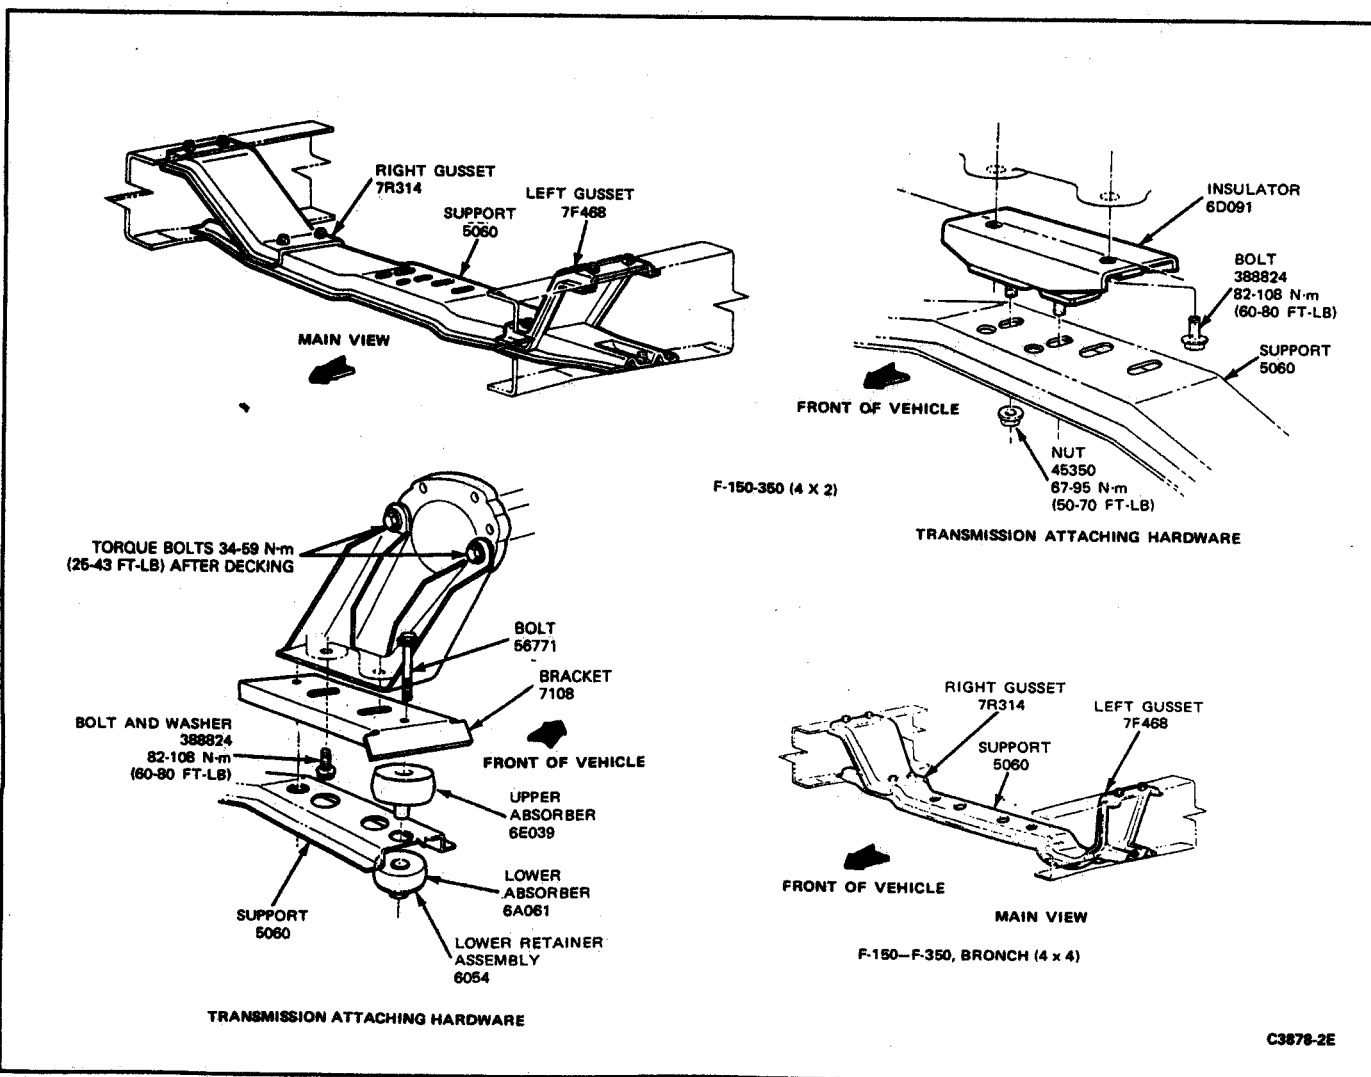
Crossmember Installation-F-150—F-350, Bronco
